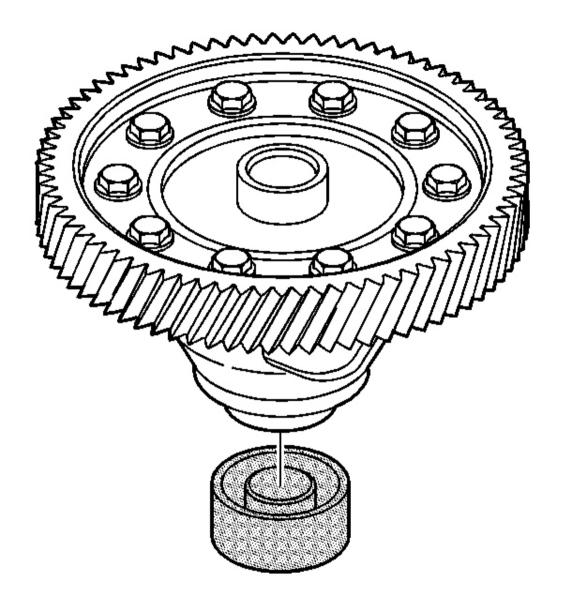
Differential Assembly & J 44388-4 Courtesy of GENERAL MOTORS CORP.
